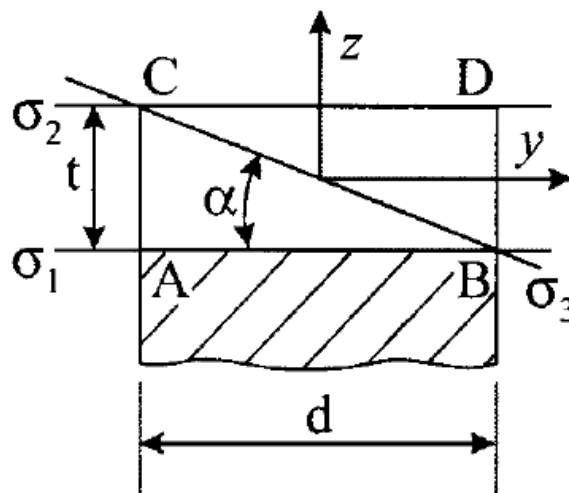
Tolerance zone on the end of a round rod. [12]
